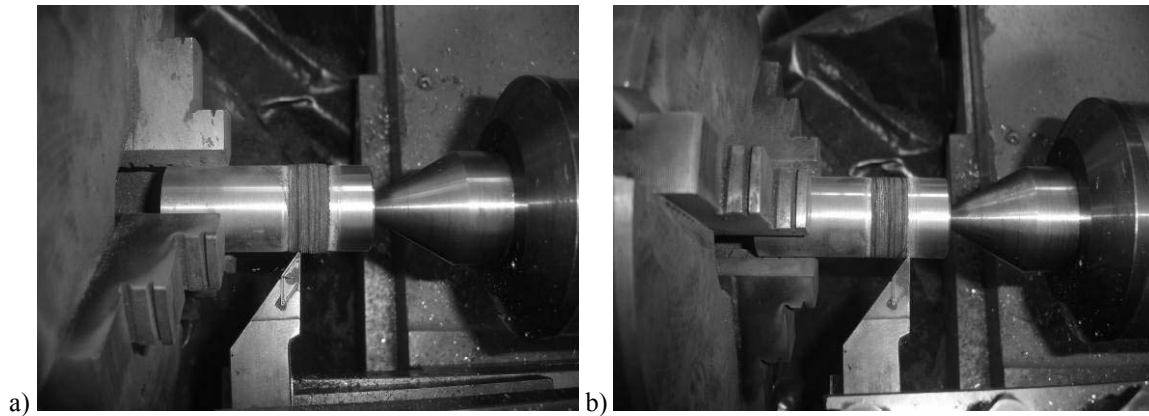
Set of patches during the machining process (a) and after machining (b).
